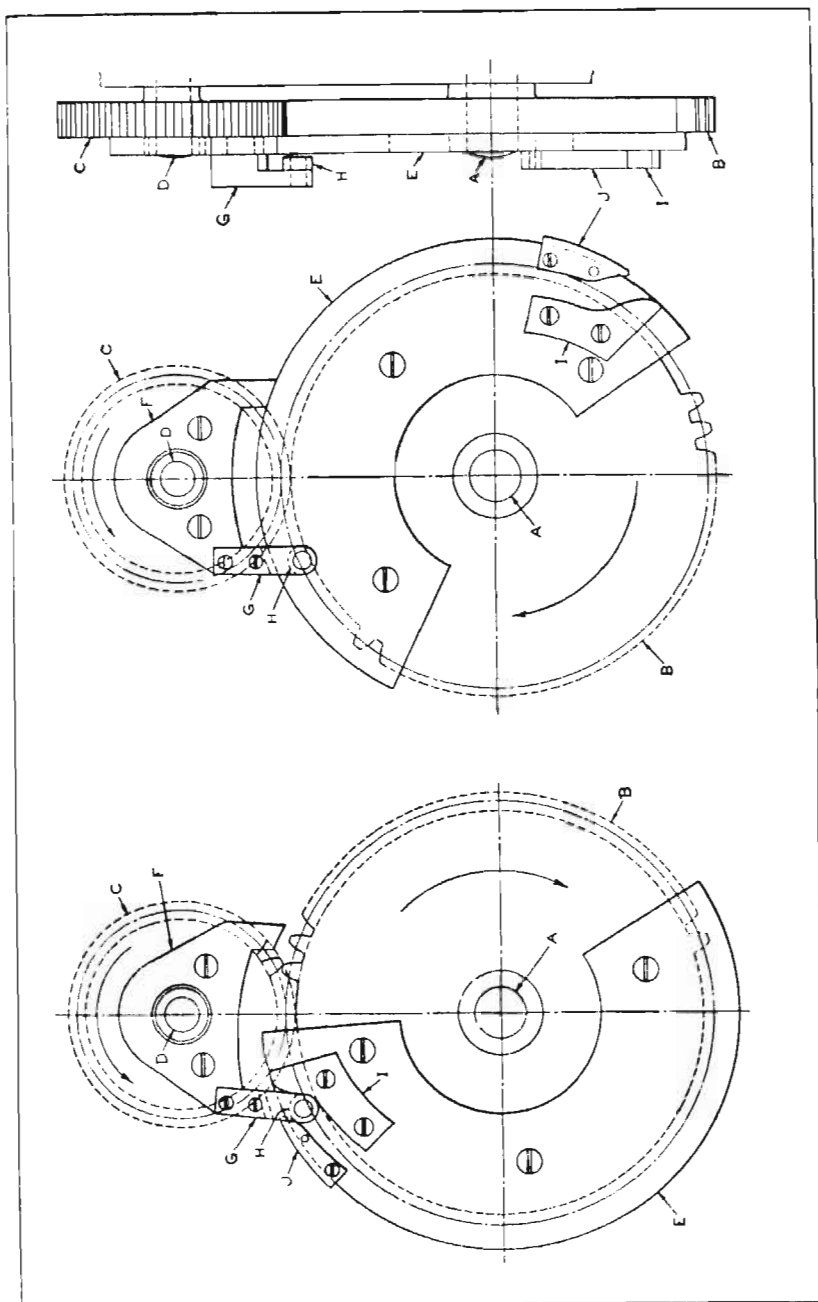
(Left) Intermittent Rotating Mechanism with Driven Gear C about to Begin Dwell; (Center) Mechanism Shown with Driven Gear C Locked against Rotation; (Right) End View of Mechanism.
